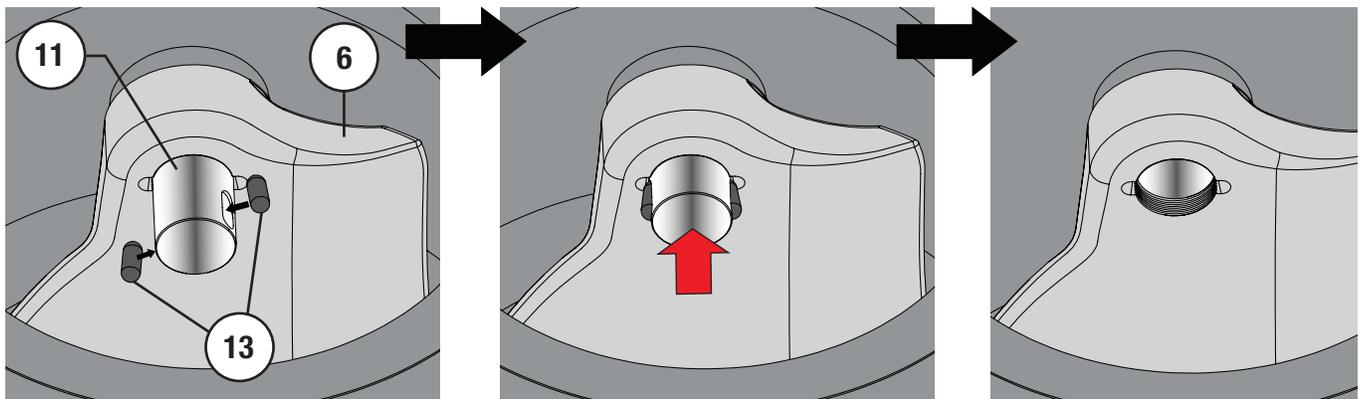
16 to 24" NPS Drive Shaft / Ball Installation
